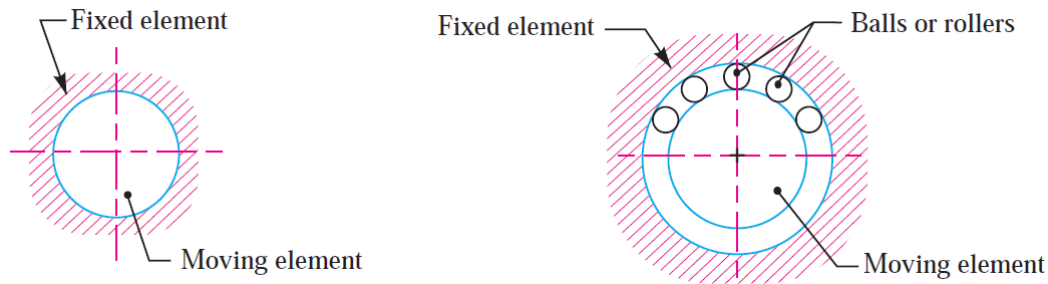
Sliding (left) and rolling (left) contact bearings. (Khurmi and Gupta)
